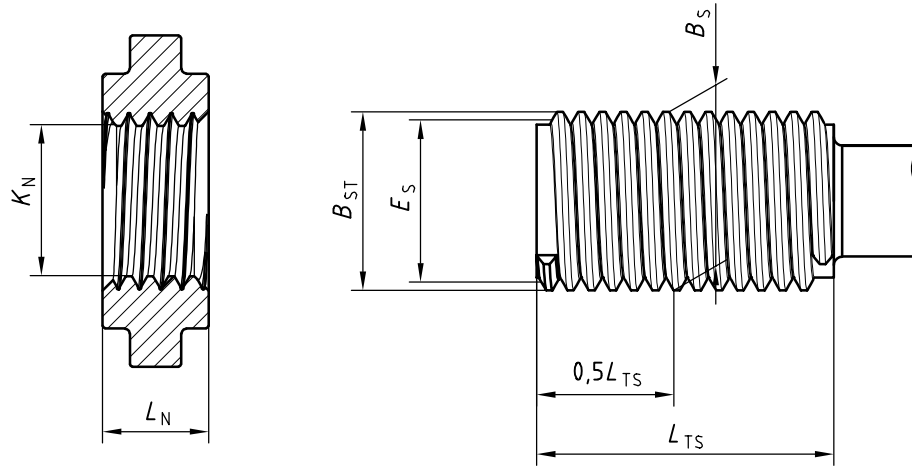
Pin go and no-go gauges (for straight-threaded portion of tapered-thread connection)
